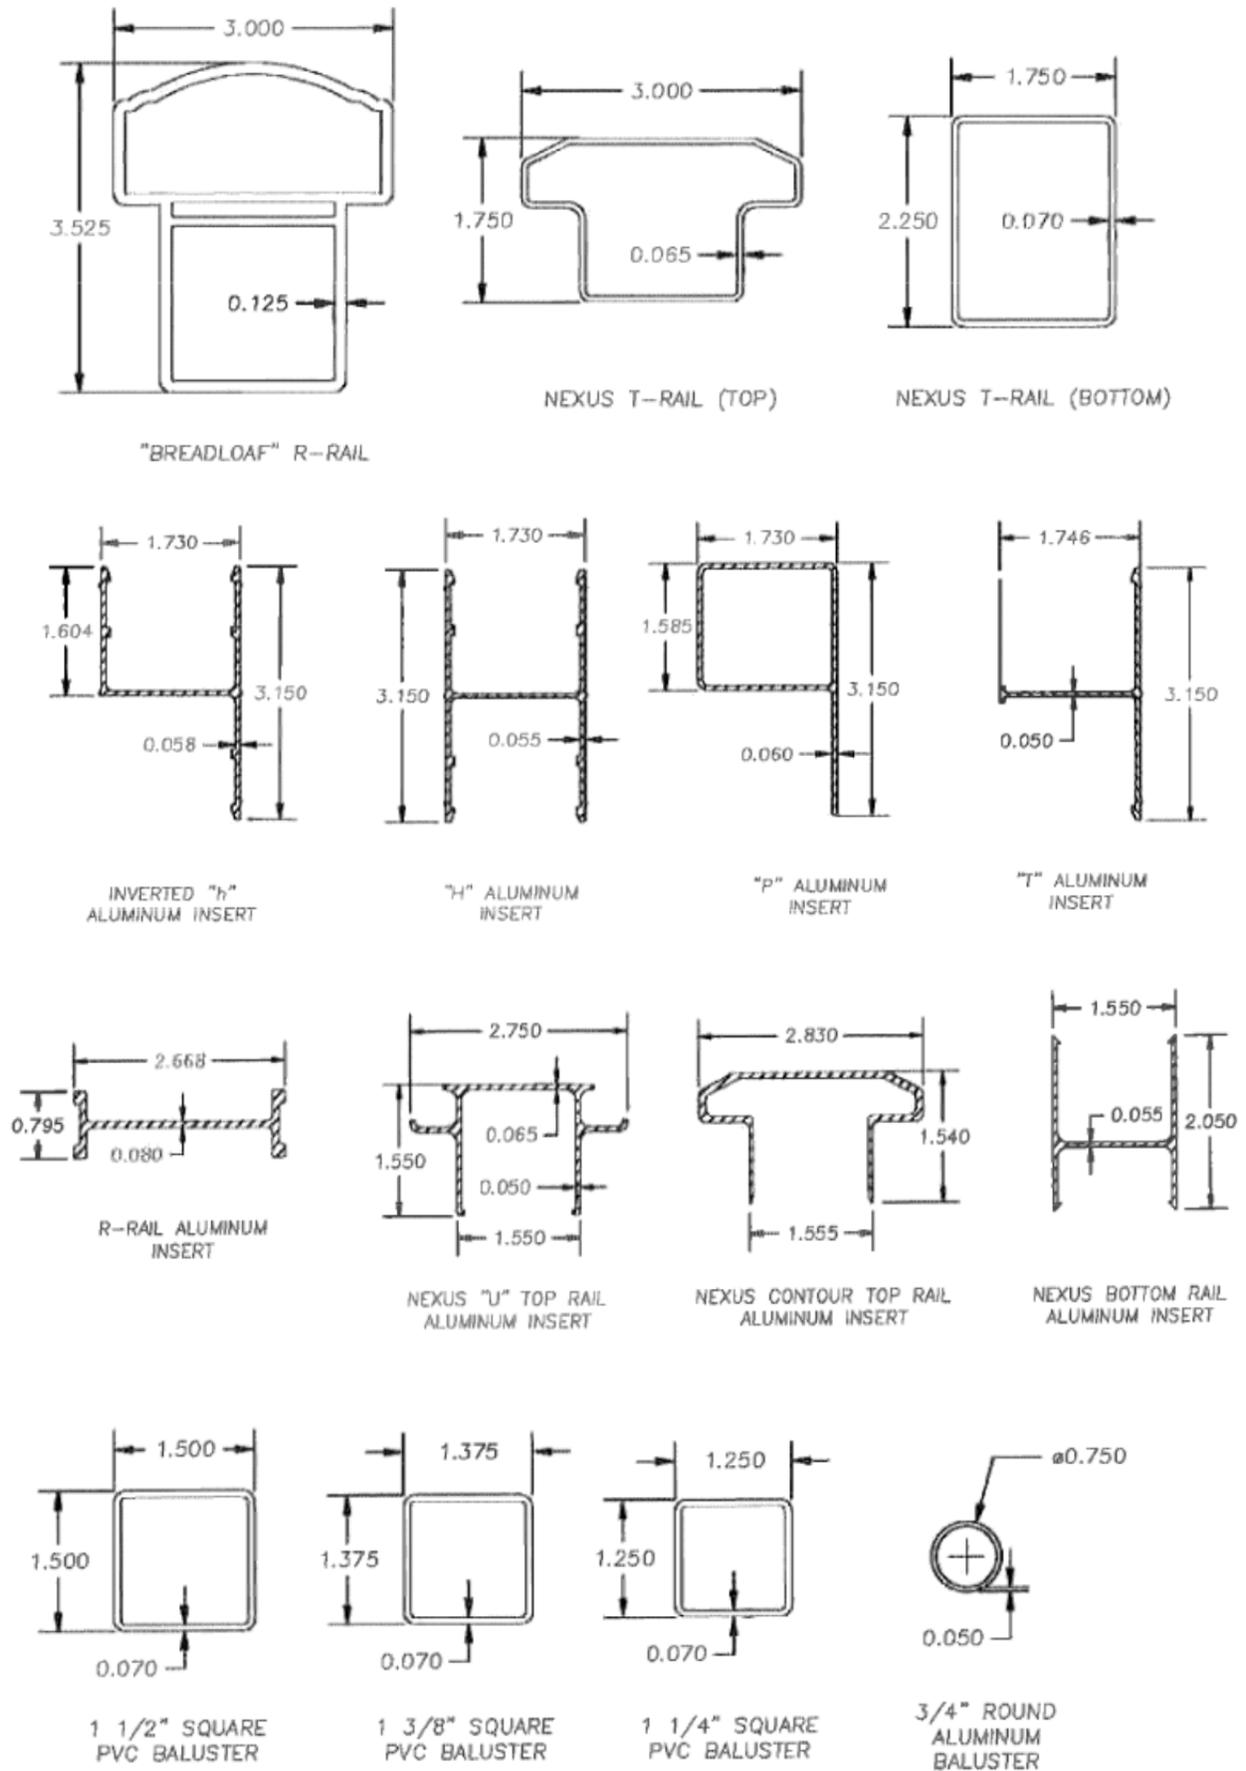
GUARDRAIL COMPONENT PROFILES (Continued)
